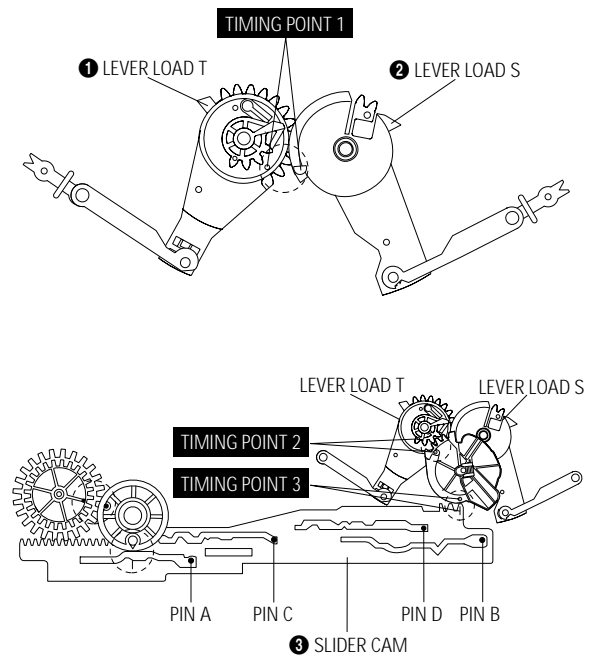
Gear Loading Drive, Slider Cam, Lever Load S, T Ass'y Assembly
